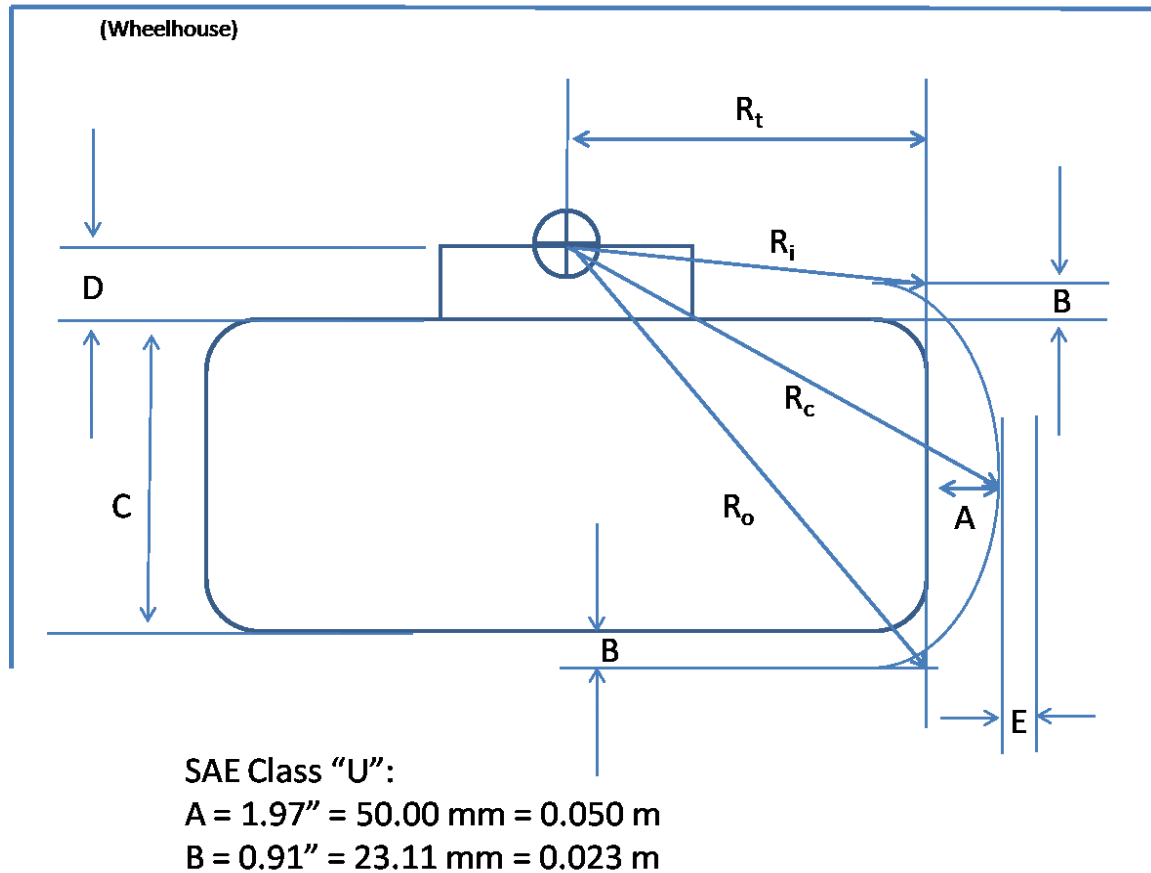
Front Tire Clearance in Wheelhouse Dimensions for Snow Chains [54, 60]
